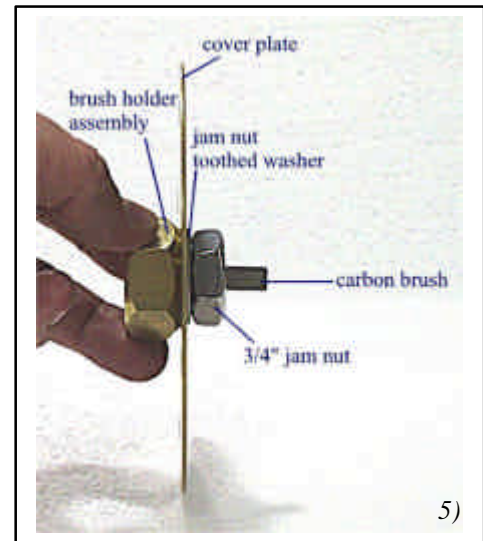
Components of RIM Tach<sup>®</sup> Shaft Grounding Brush Assembly (end-of-shaft)
